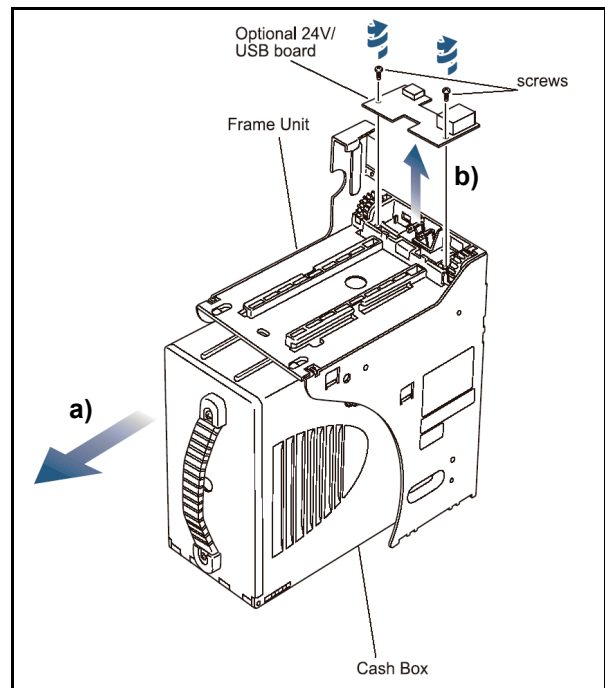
UBA Unit Cash Box & USB Board Removal
